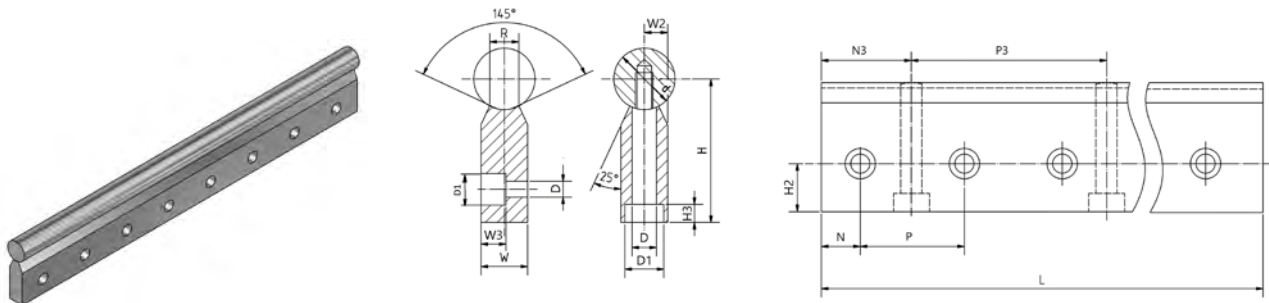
Support rails for lateral mounting with one row of bore holes
